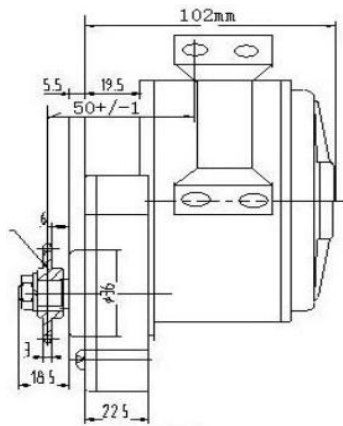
Dimensions of the 36 volts, 250-watt reduction motor
